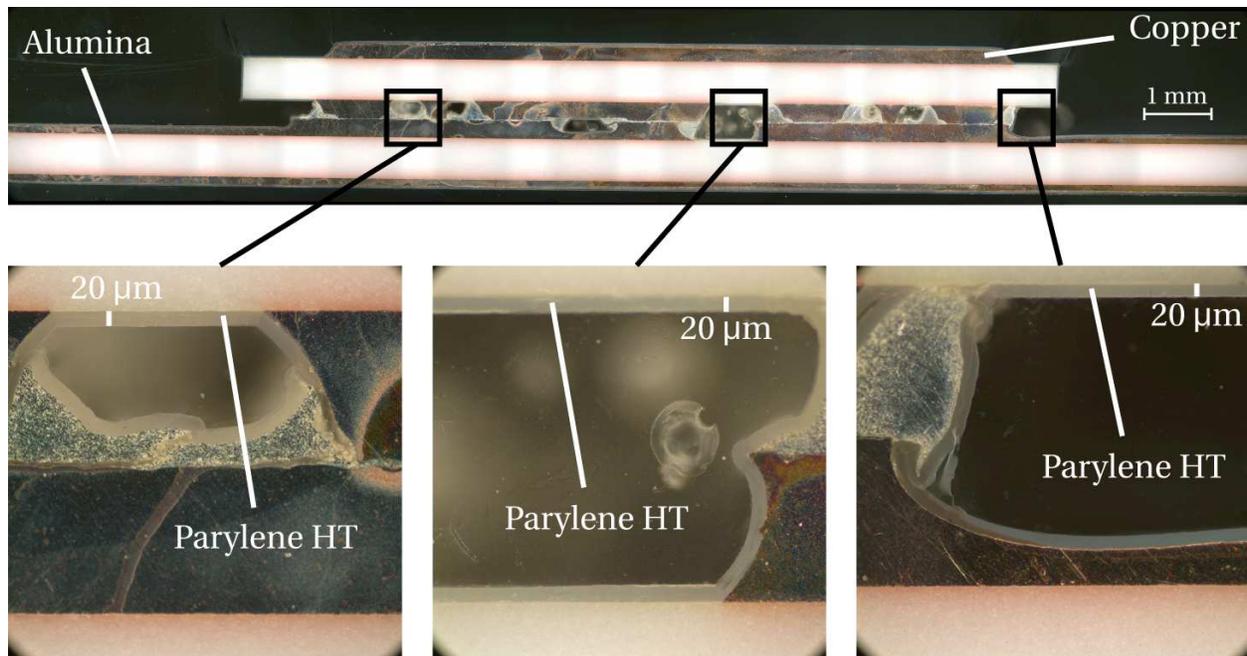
Cross section of a test assembly (no dies, poor control of copper etching and silver sintering) showing that the parylene HT coating is uniform over the entire sample, even in the most intricate cavities..
